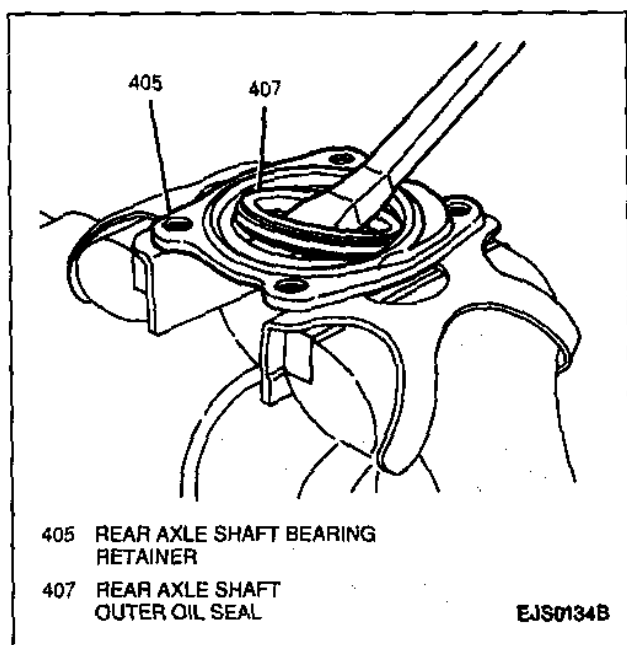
Removing Rear Axle Shaft Outer Oil Seal
